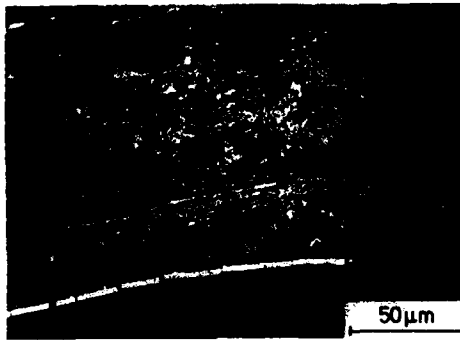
Specimen with Ti N coating. Longitudinal section after failure at 350°C
